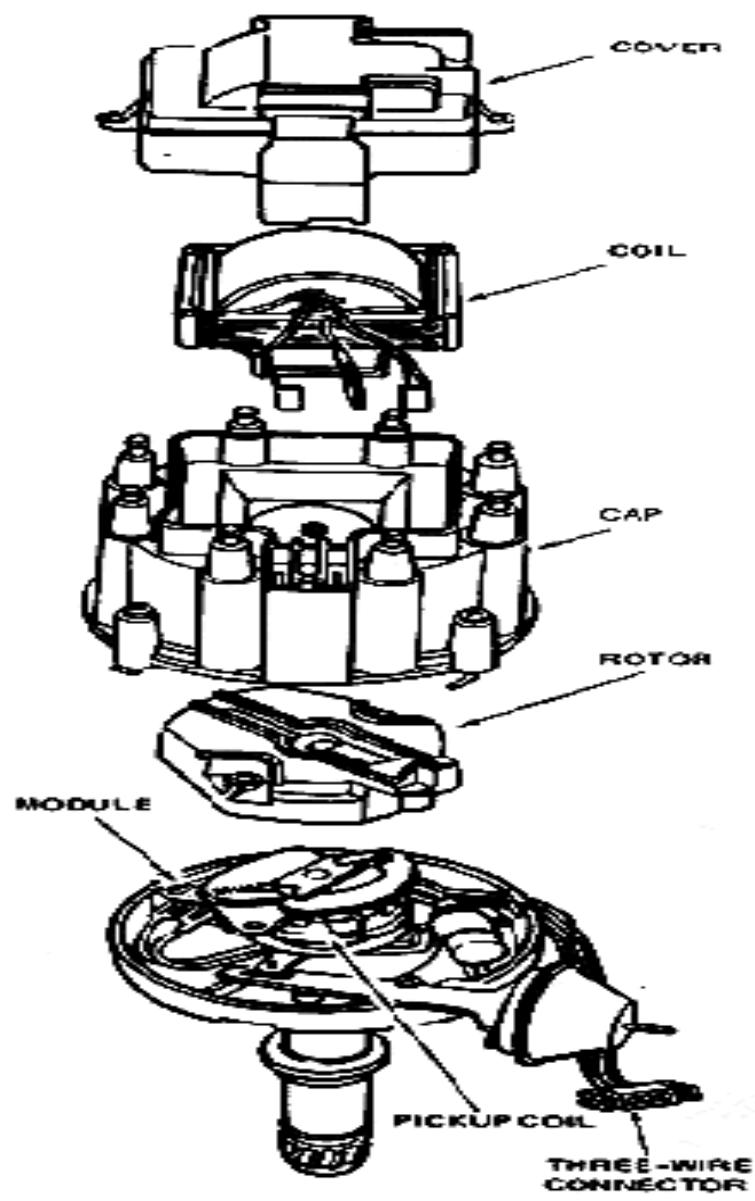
Unit Distributor, Partly Disassembled. (Delco-Remy Division of General Motors Corporation)
